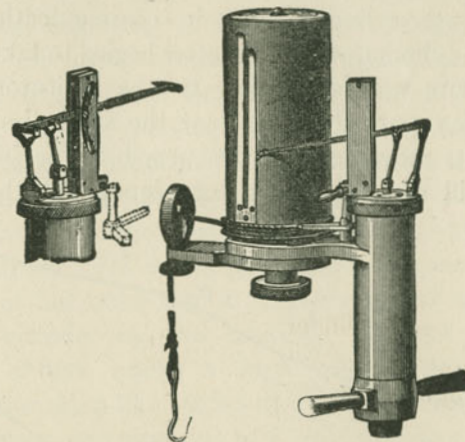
gives perspective and sectional views of the Tabor indicator, an instrument well adapted for application to locomotives. The card to be marked is fastened in the paper drum attached to the indicator. This drum receives a circular motion from a cord which is operated by the cross-head of the locomotive, and the connection is so arranged that the drum will begin to move round just as the main piston begins its stroke. The circular motion of the
